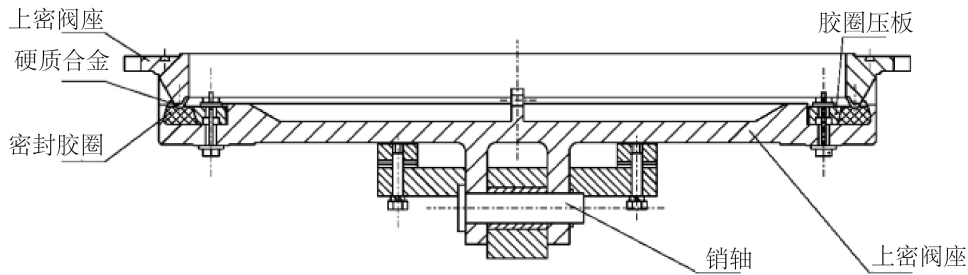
Structural drawing of the traditional upper sealing valve plate and valve seat
